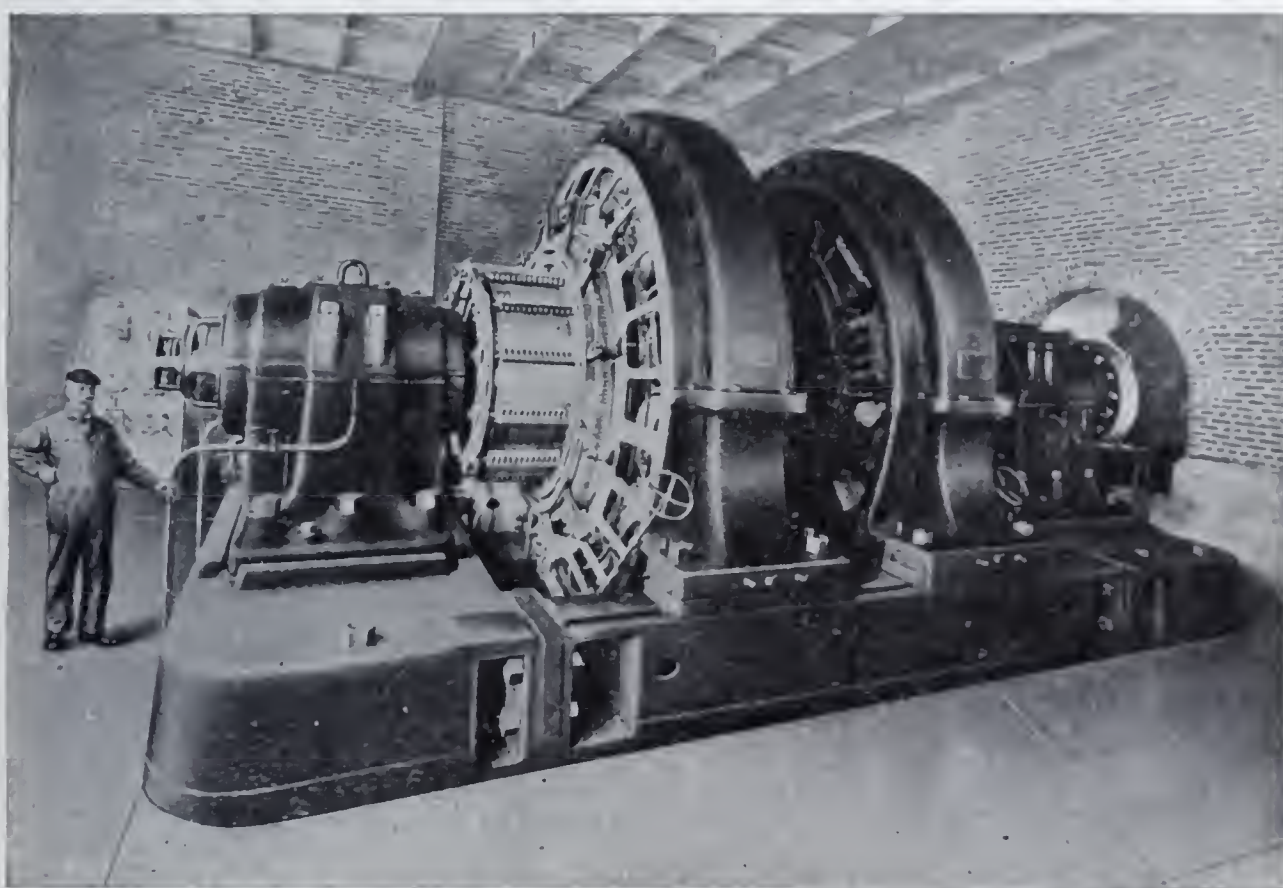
Reversible Mill Motor Set Driving 30 in. Plate Mill.
